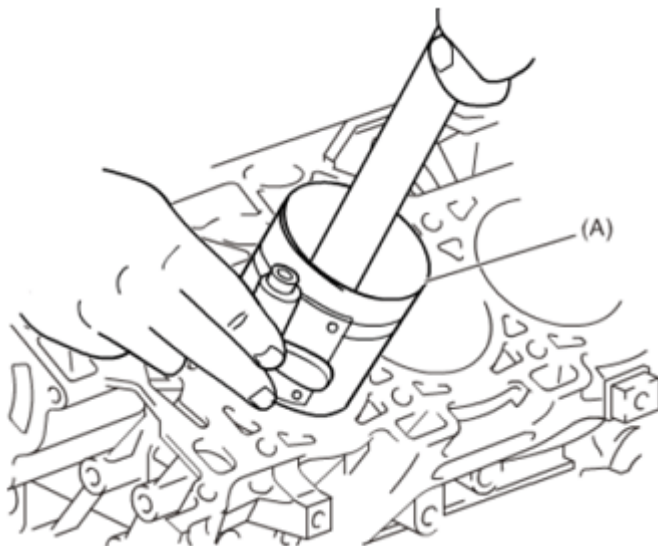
Installing Piston And Connecting Rod Assembly Into Cylinder Bore
